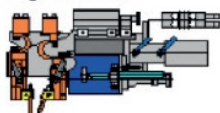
Z and F160-Z - Weld Pincers for Automation
